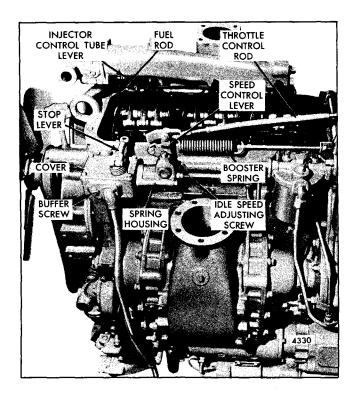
Buffer and Idle Speed Adjusting Screw
